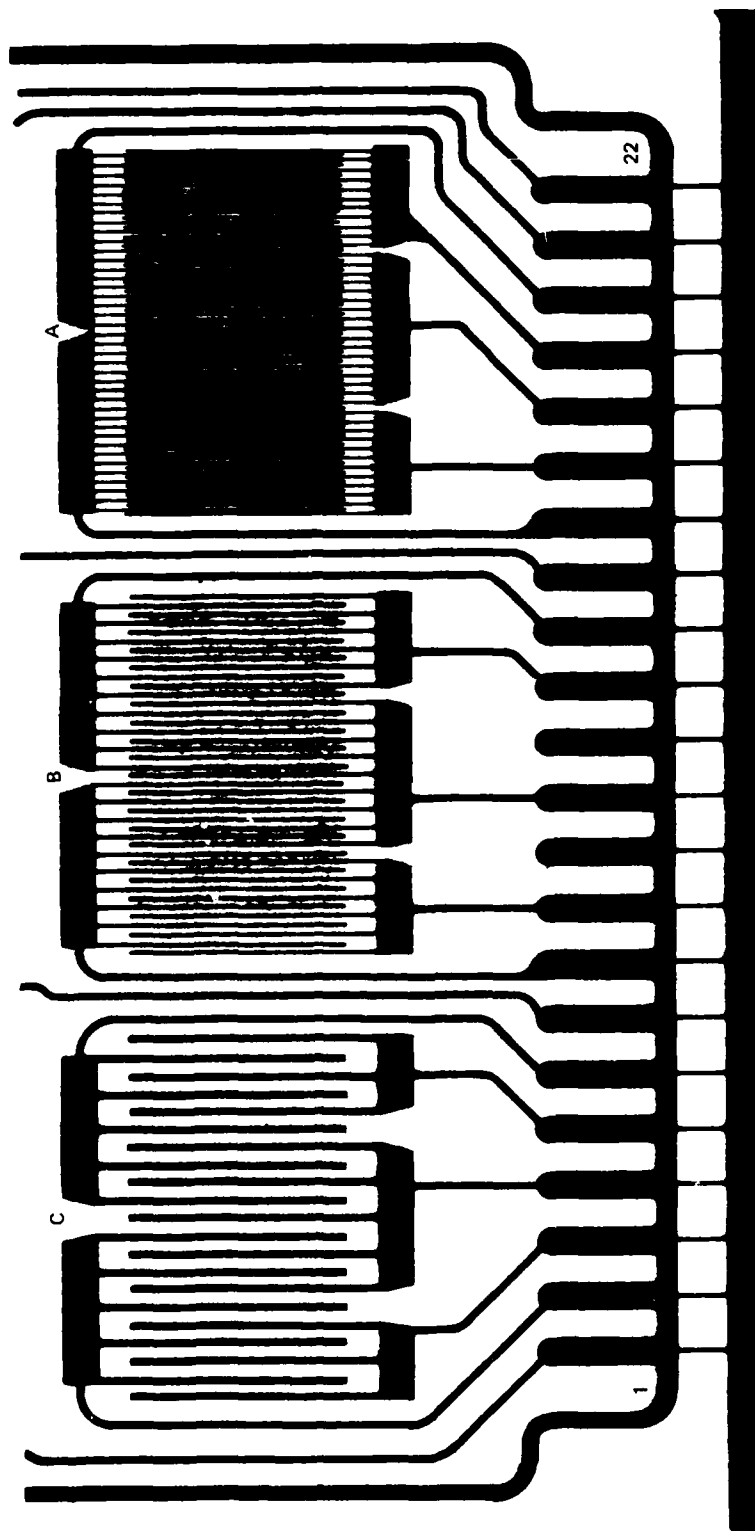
SAMPLE PRINTED WIRING BOARD.
